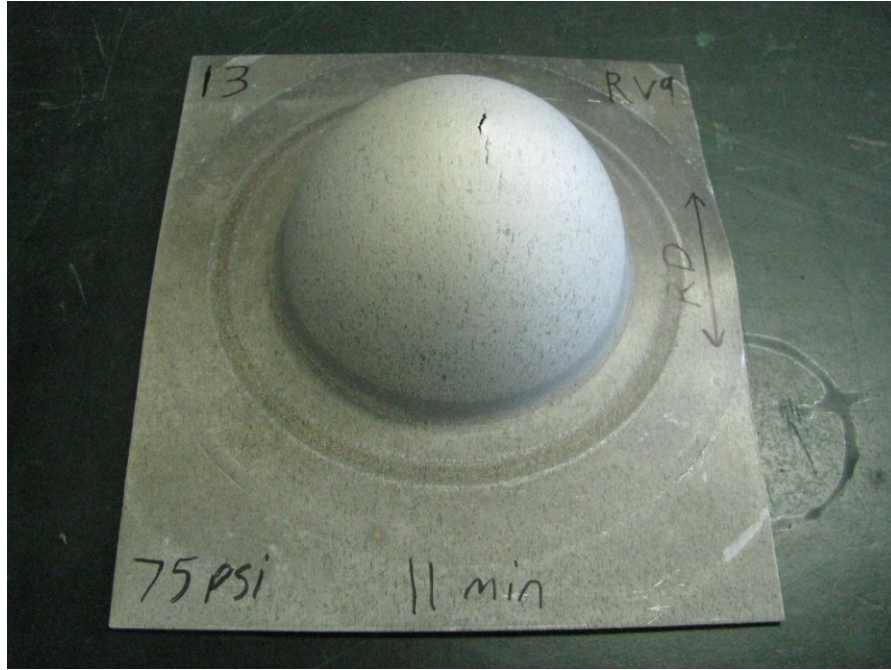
A biaxial gas-pressure bulge forming specimen is shown. AZ31 sheet was formed into a circular die with a diameter of 100 mm. The specimen was formed at 450°C and a gas pressure of 75 psi.
